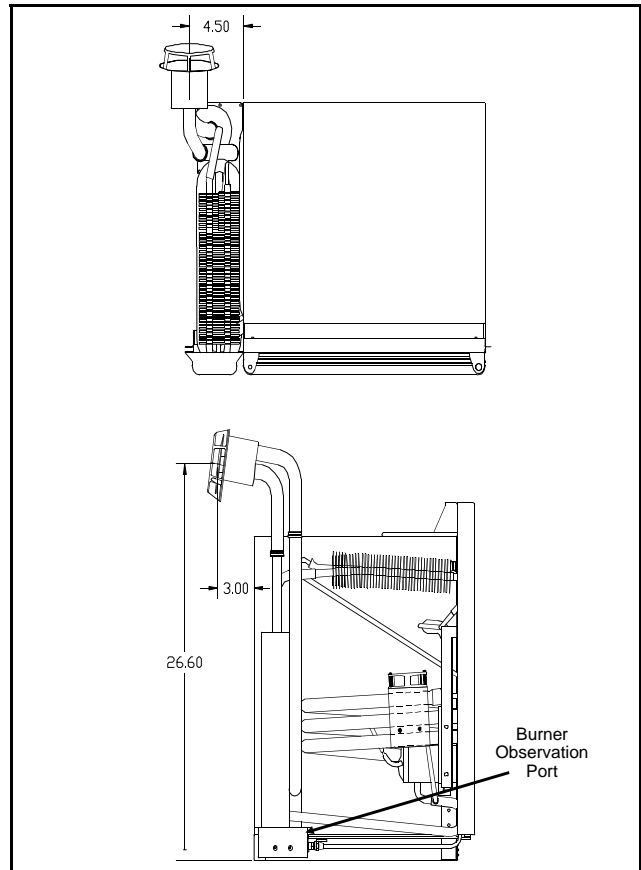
Kit# 617941 Flexible Pipe and Vent Location
